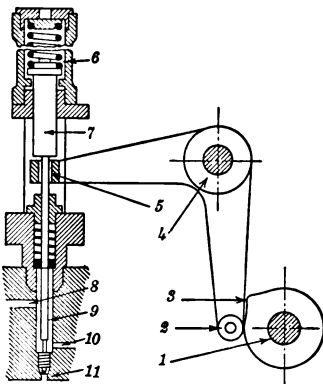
FUEL-OIL VALVE, BELL CRANK AND CAM
